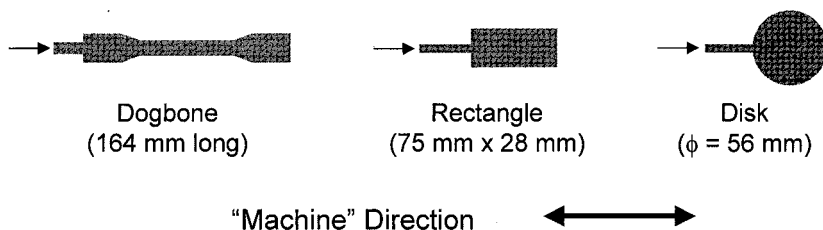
Dimensions of injection moulded specimens. The thickness was 3.2 mm in all cases.
